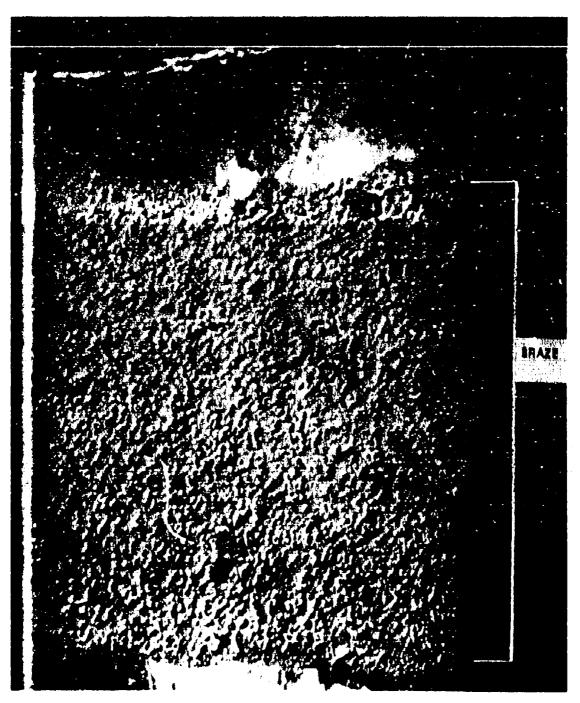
Brazed Specimen C-29 After Tensile Test, Showing Location of Rupture. (Environmental-test conditions: 800F, 130 ksi, no salt; duration: 63 cycles) (EP-2172-10) Mag: 10X
